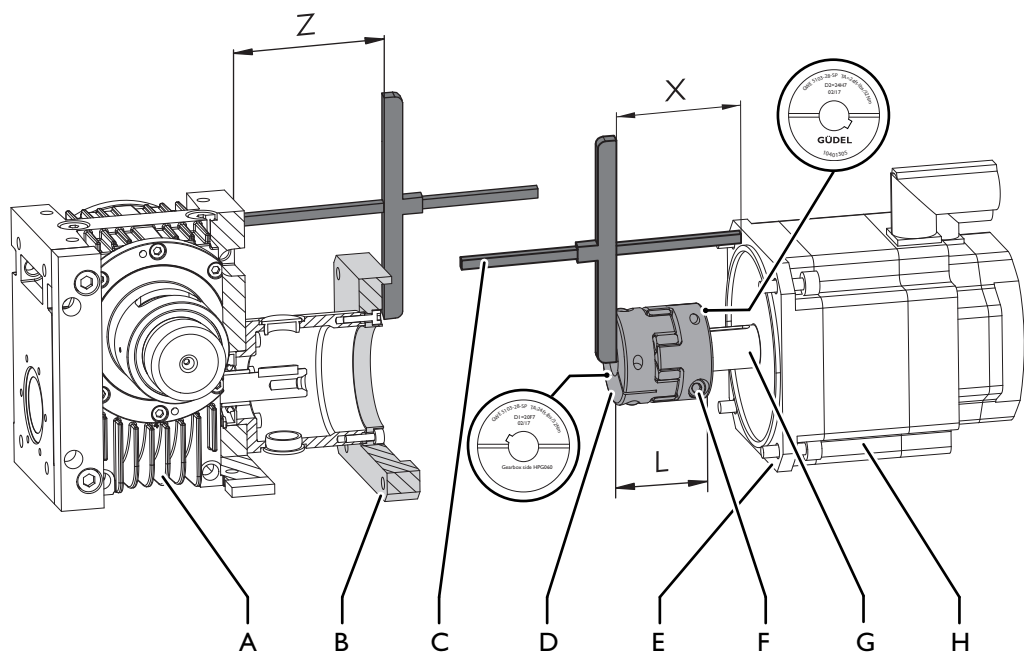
Positioning the coupling on the motor shaft: Elastomer coupling
